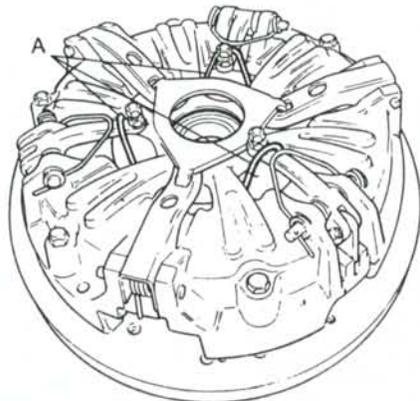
Use retainers (A) made from stiff wire to hold pto clutch release levers down during removal and installation of clutch. Do not use soft wire or welding rod as they will not retain pressure of clutch springs.
